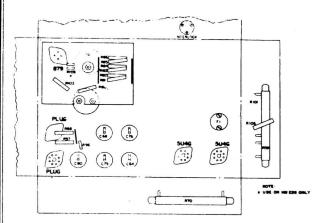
Power Chassis Parts Layout LOUD-SPEAKER
